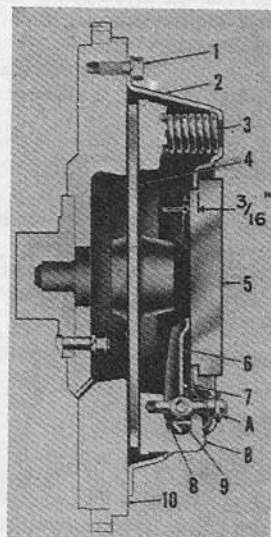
Model TE20, Borg & Beck model 9A6 clutch. Adjust release levers to 3/16 inch measurement as shown.
